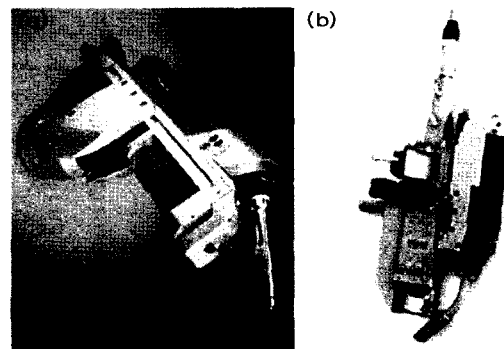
Nd:YAG laser - MIG hybrid Welding head (a) FRONIUS and (b) HIGHYAG
